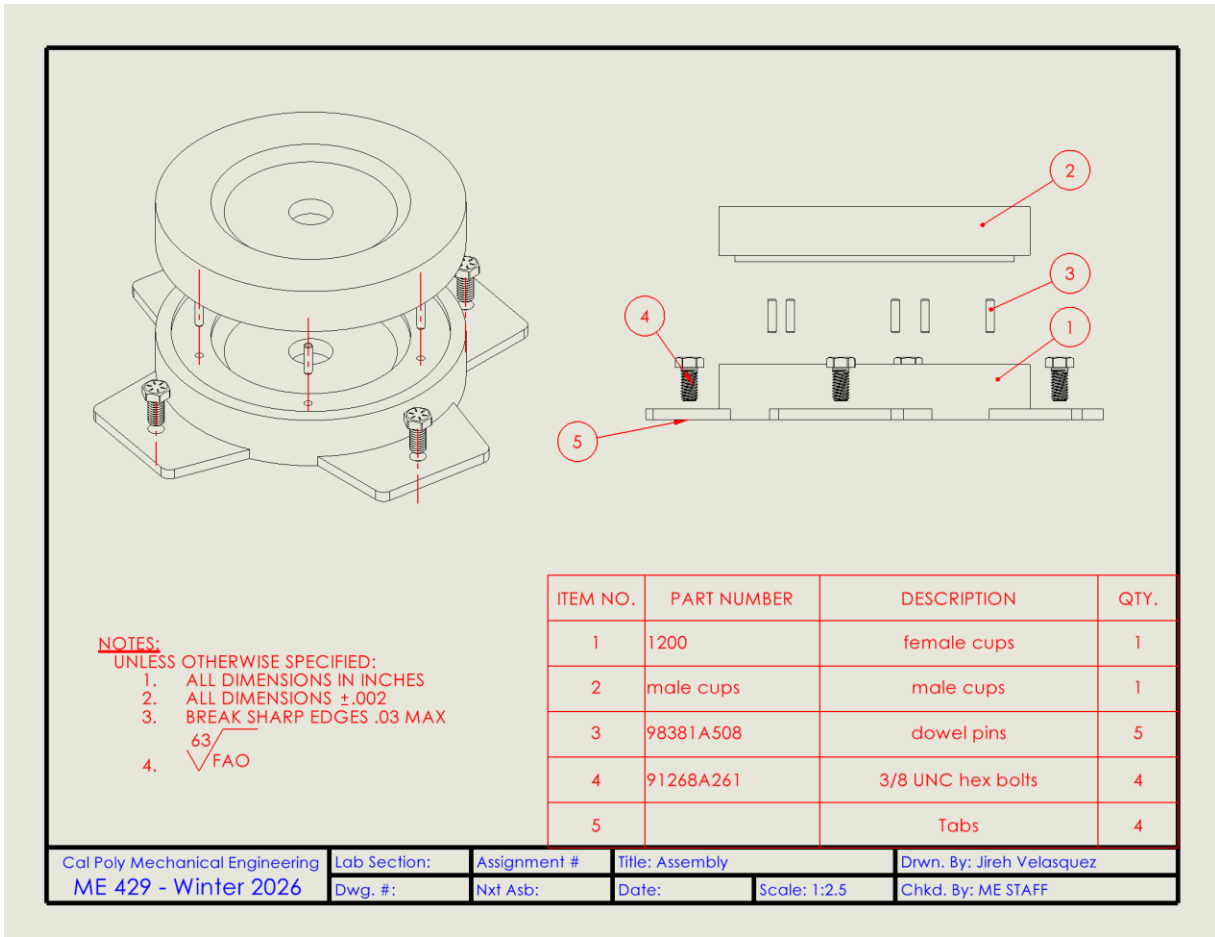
Exploded assembly view for assemblies 1000 and 2000
